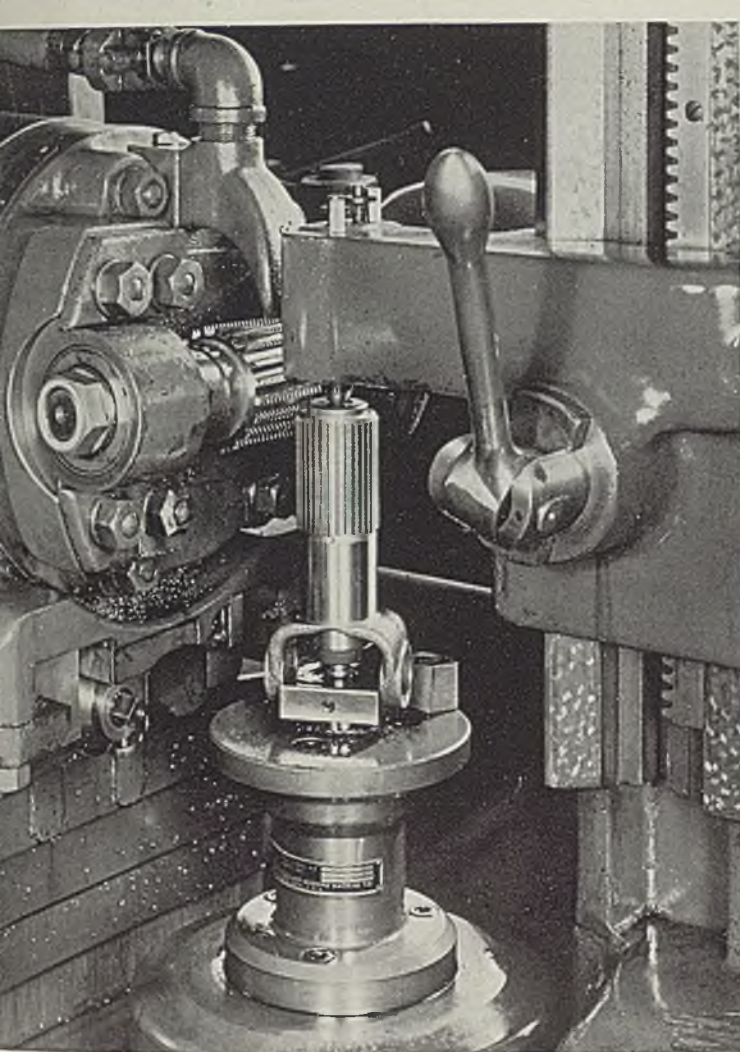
Series 900 Michigan rack-type gear shaving machines finish the splines on universal joint yokes made by Universal Products Co., Detroit. See top view opposite page
